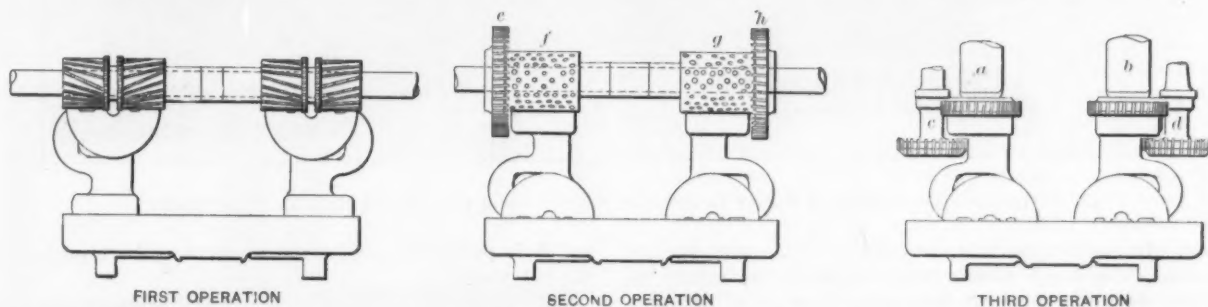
Diagram of the Three Operations.—Milling the Crank Case Cover Seats; Milling the Tops of the Cylinders and the Intake and Exhaust Connection Seats, and Finishing the Tops of the Cylinders and the Seats for the Faces of the Valve Bushings.
